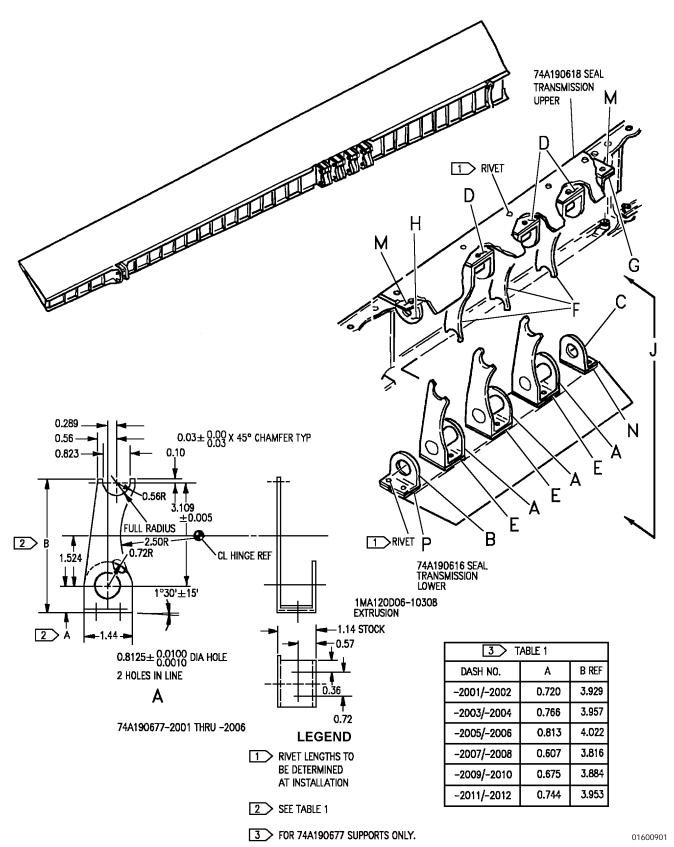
Transmission Seal Assembly, 74A190678, Replacement (Sheet 1)
